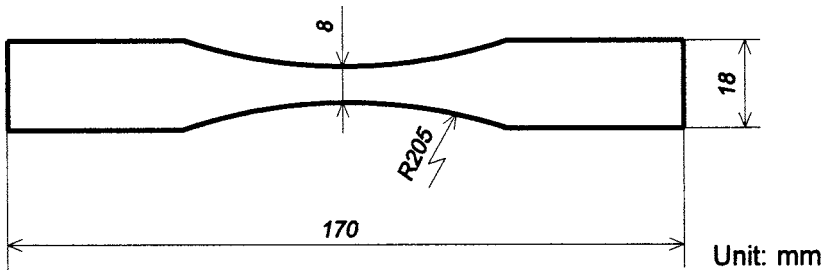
Shape and dimensions of specimen (thickness = 4 mm).
